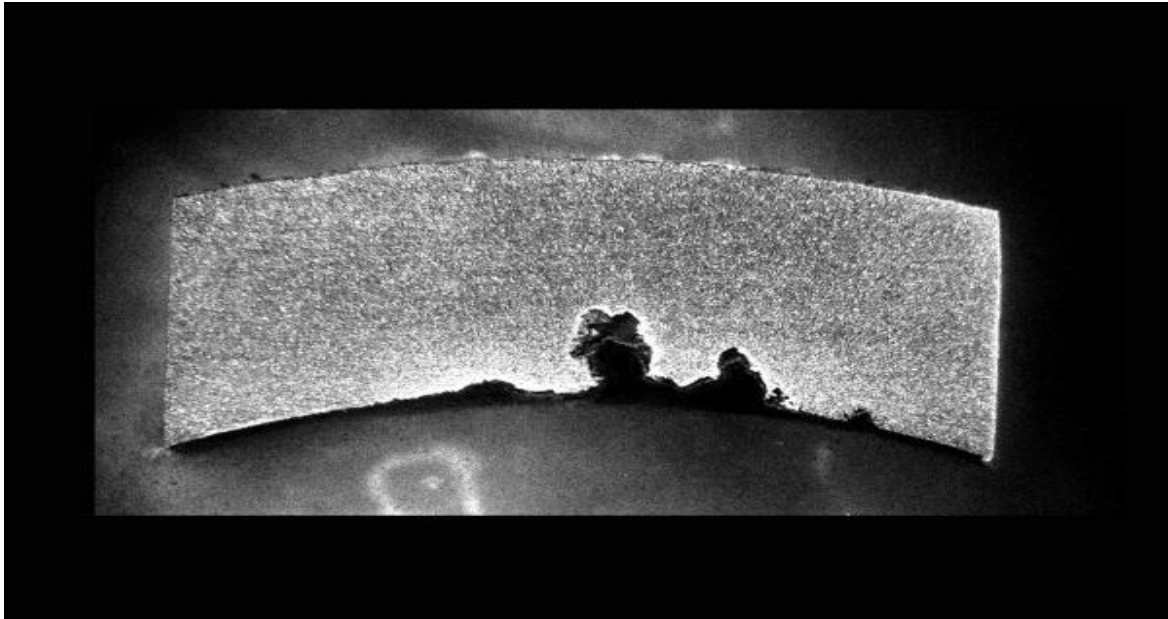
Pitting corrosion in boiler tube C [32]
